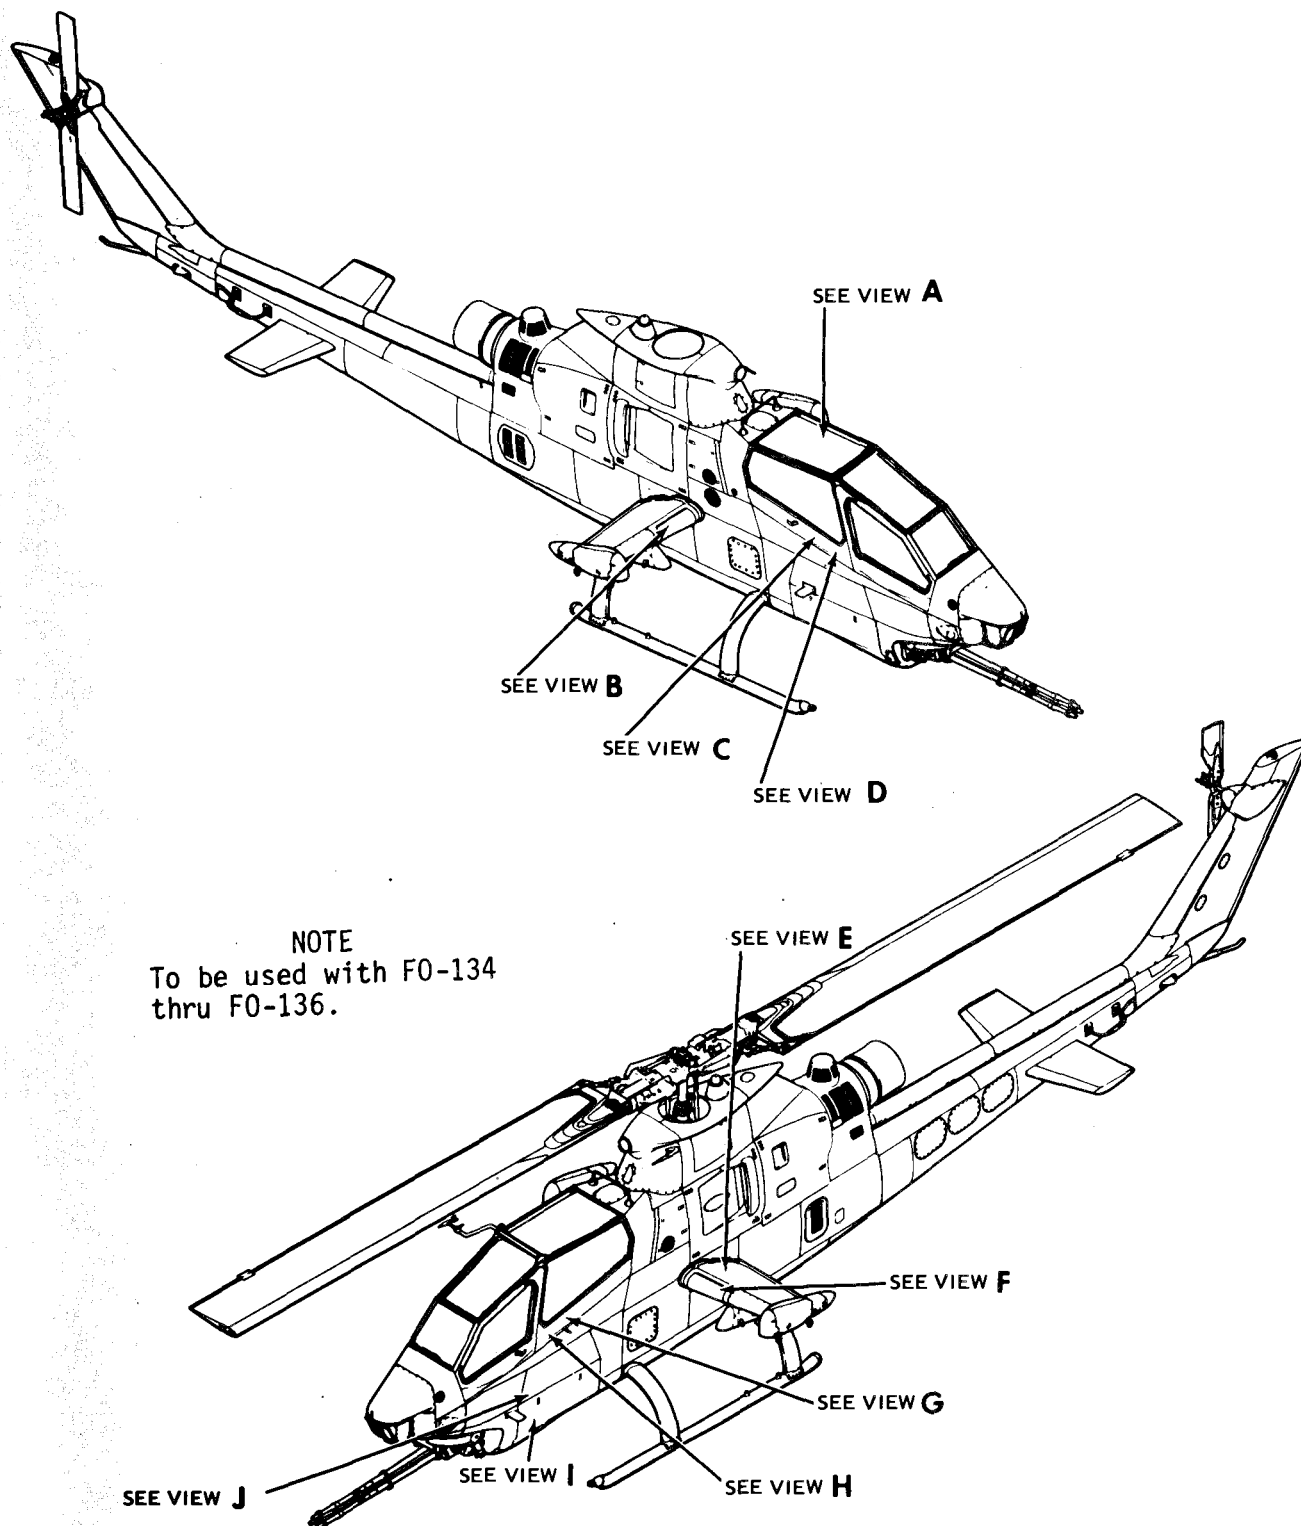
M Fire Control System (Equipment Location) (Sheet 13 of 14)
